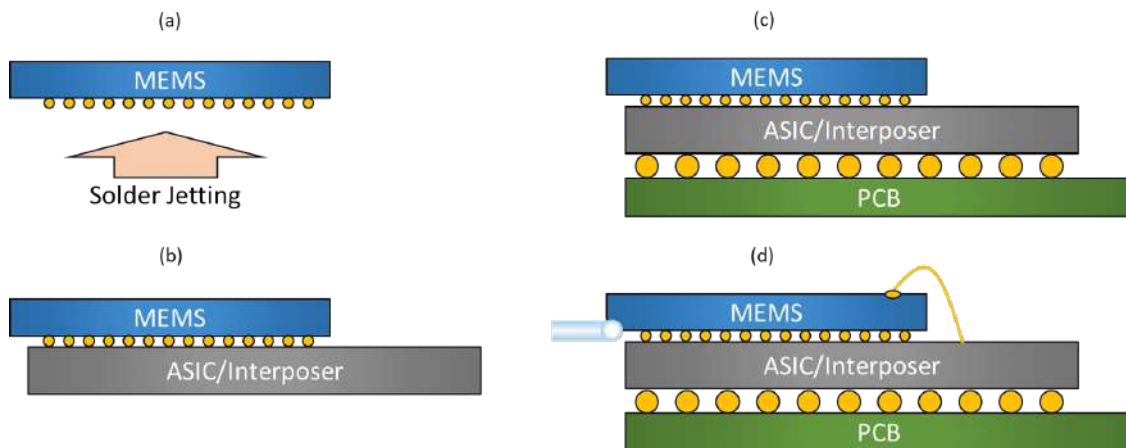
Packaging and assembly process flow for an integrated silicon photonic MEMS device. (a) Solder jetting of MEMS device. (b) Flip-chip soldered MEMS device onto interposer. (b) Attach flip-chip assembly onto test board (PCB), (d) optical assembly (and top-level wire bonding if required)
